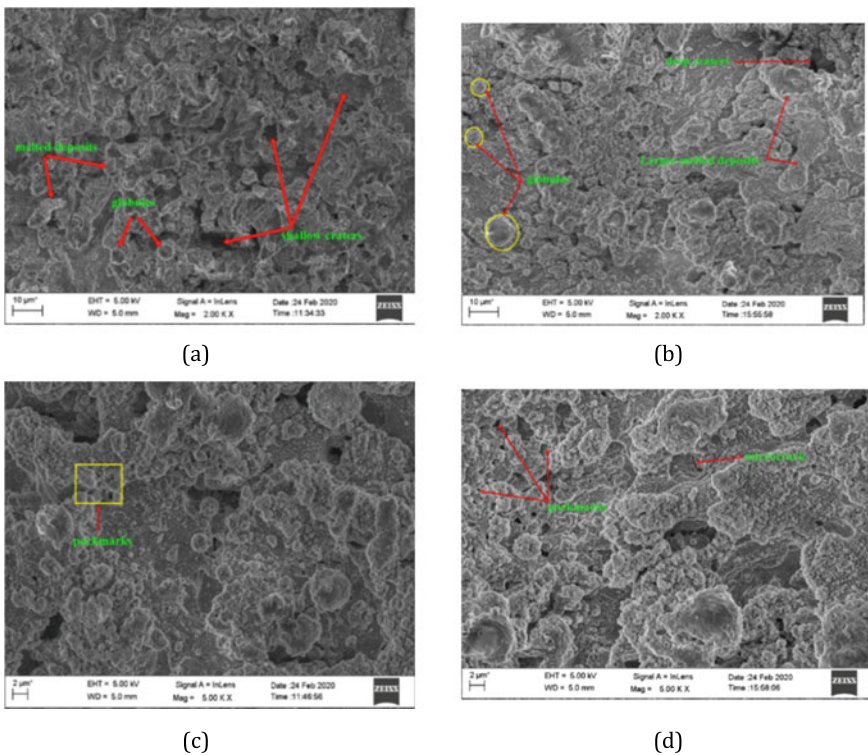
FESEM micrographs of machined surfaces a and c LPE setting, b and d HPE setting
